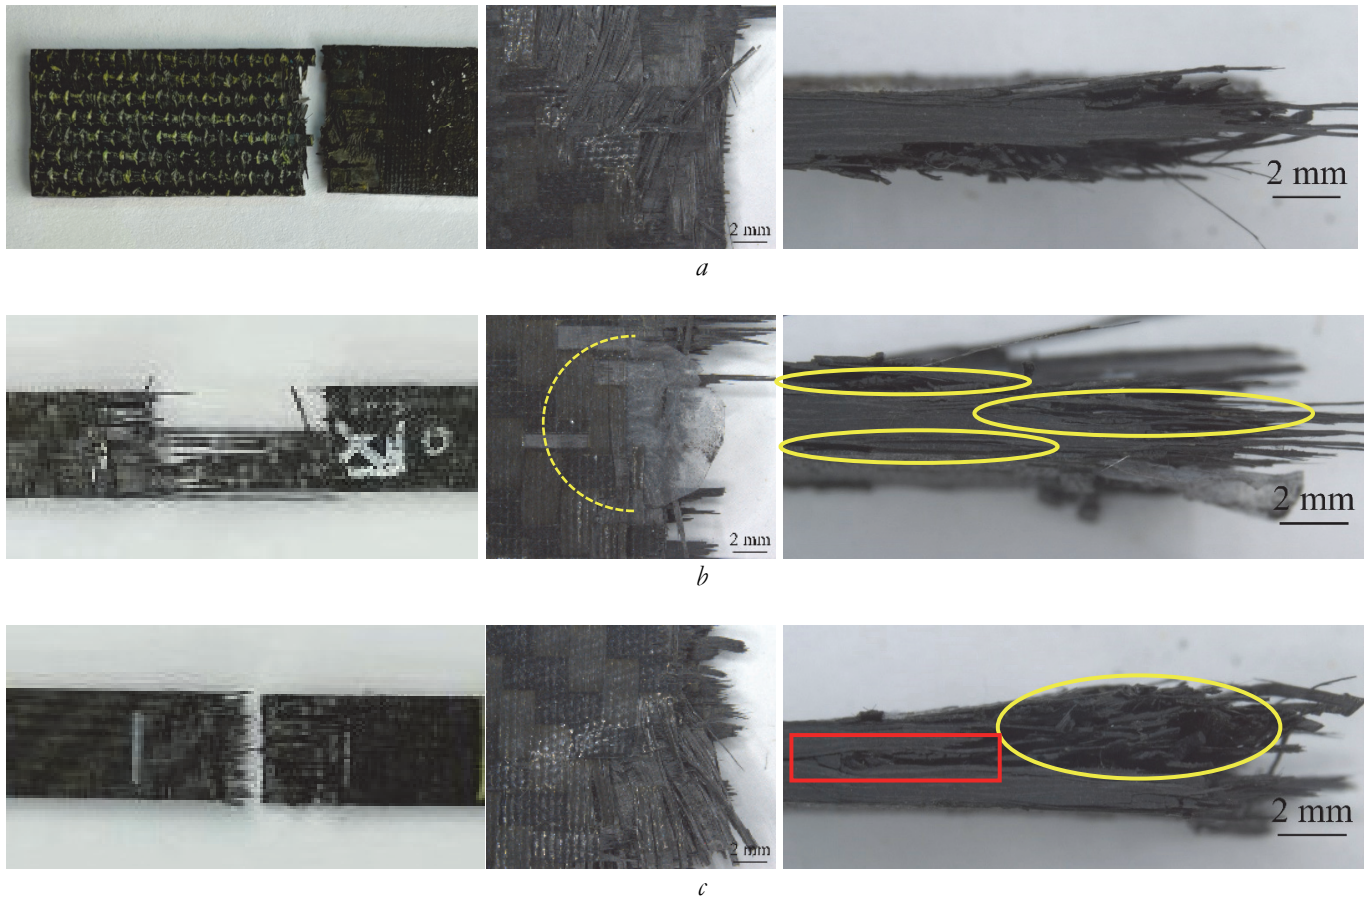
Typical photographs and fracture surfaces of failed specimens: a) without defect; b) with the dry-spot defect (circular shape); c) with the wrinkling defect (Z-shaped layer bend).
